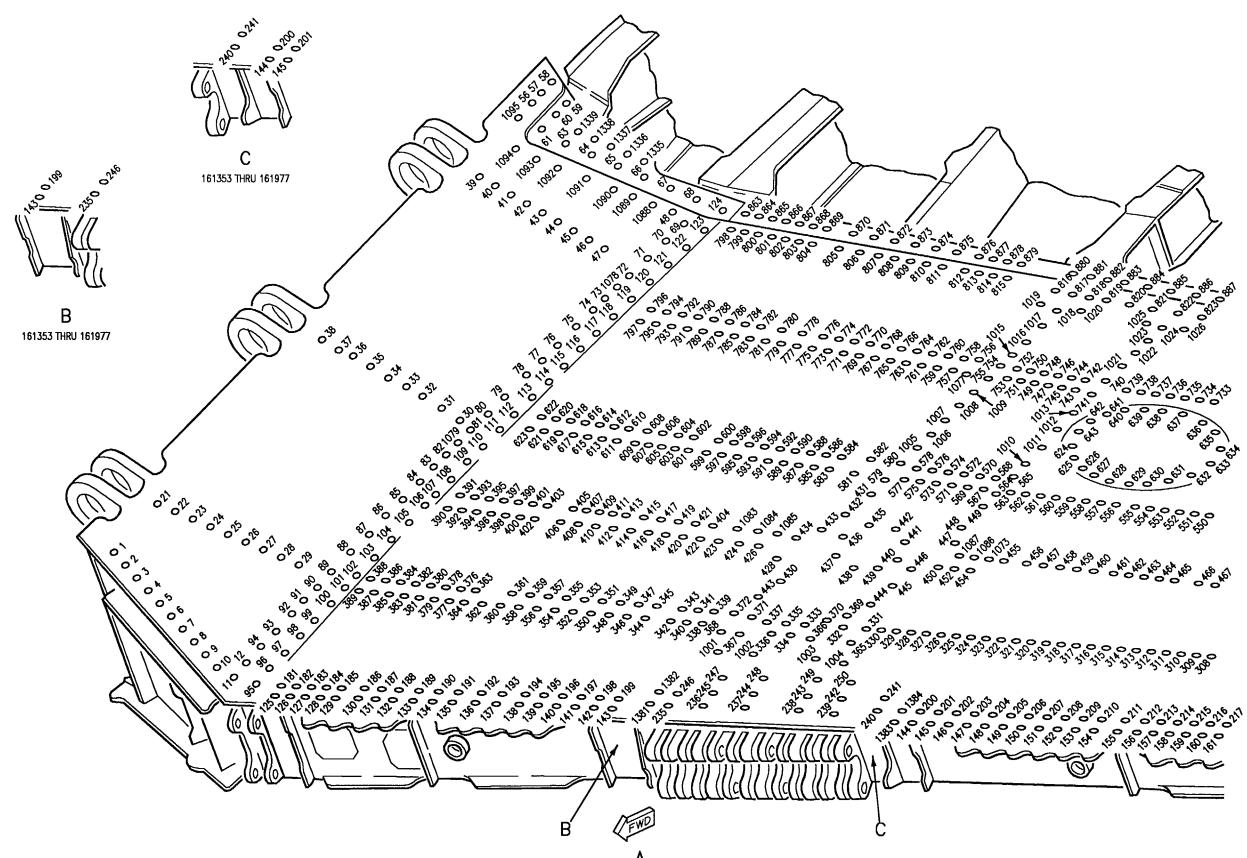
Inner Wing Skins Hole Numbers (Sheet 2)
